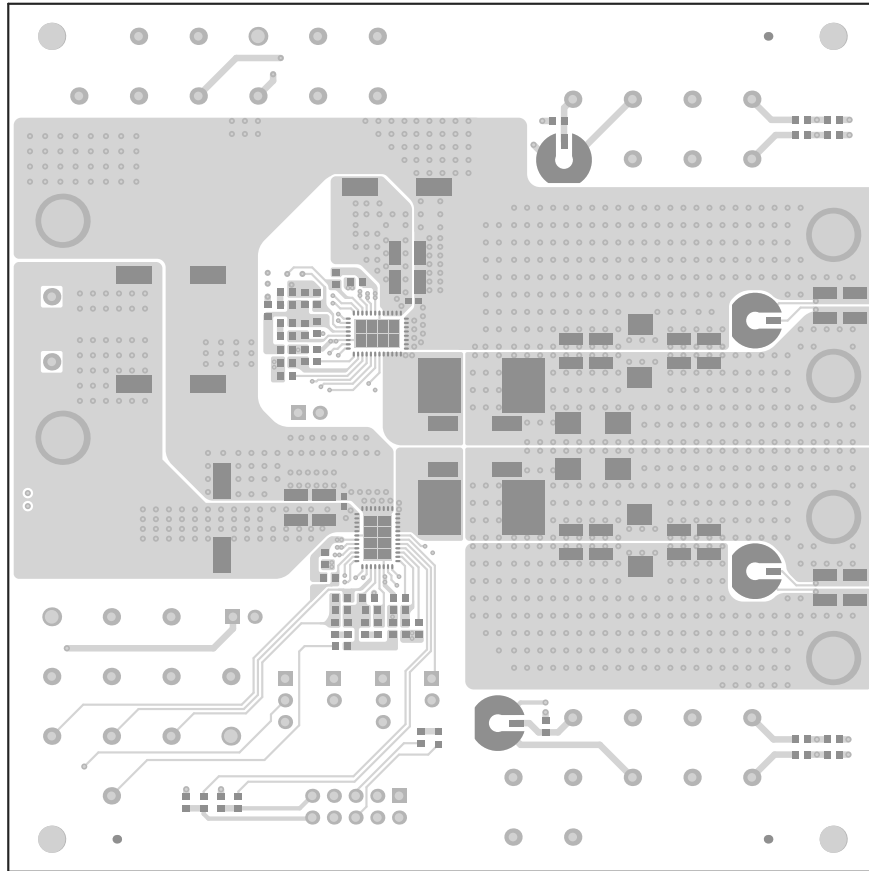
TPS546C23EVM2-746 EVM Top Copper (Top View)
